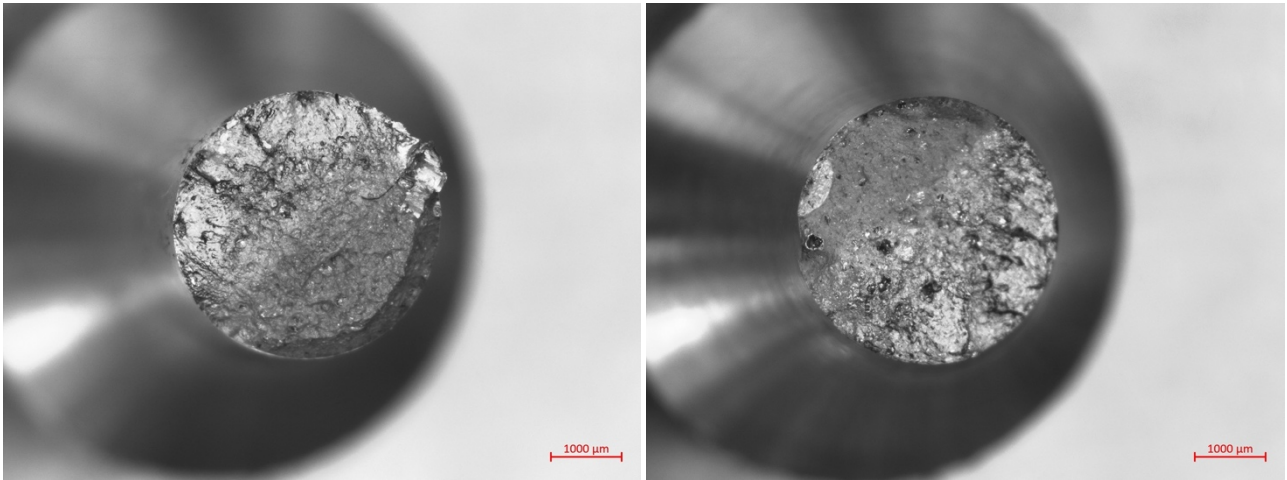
Fracture surfaces of coupons 3 (left) and 5 (right)
